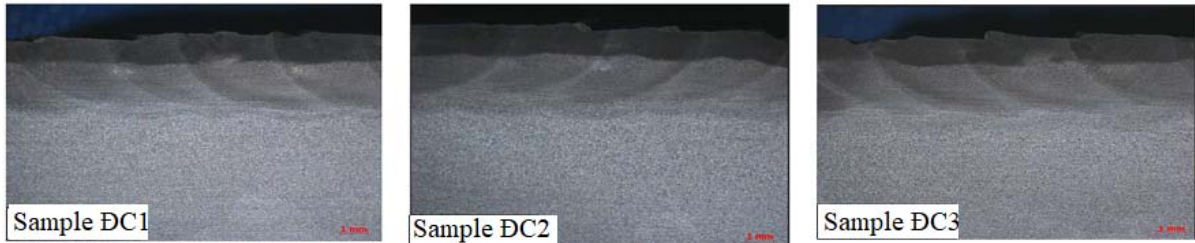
Macrostructure of welding exploratory samples (16x)
